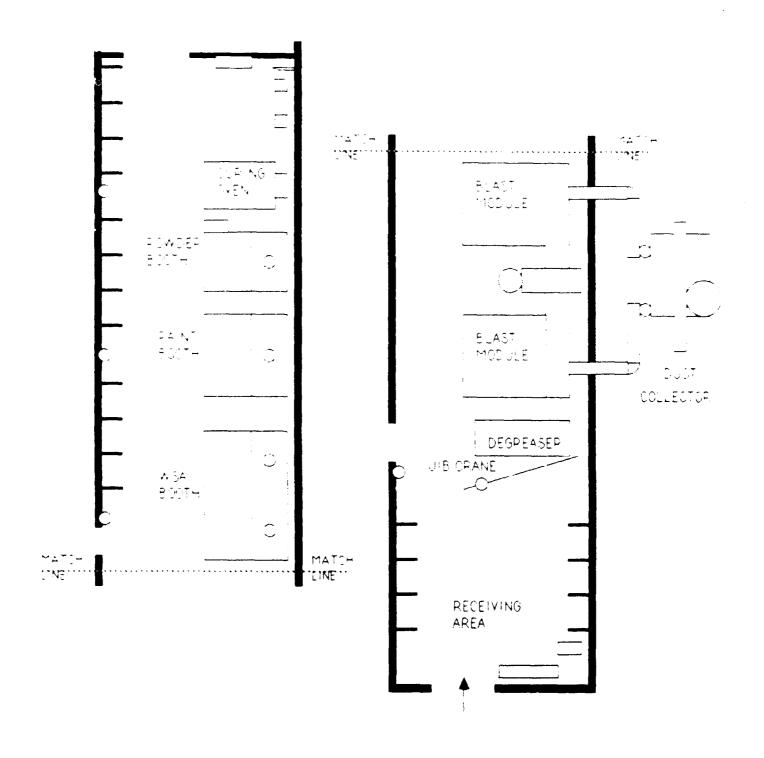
SIMA(SF) CC Shop Layout (Current)
